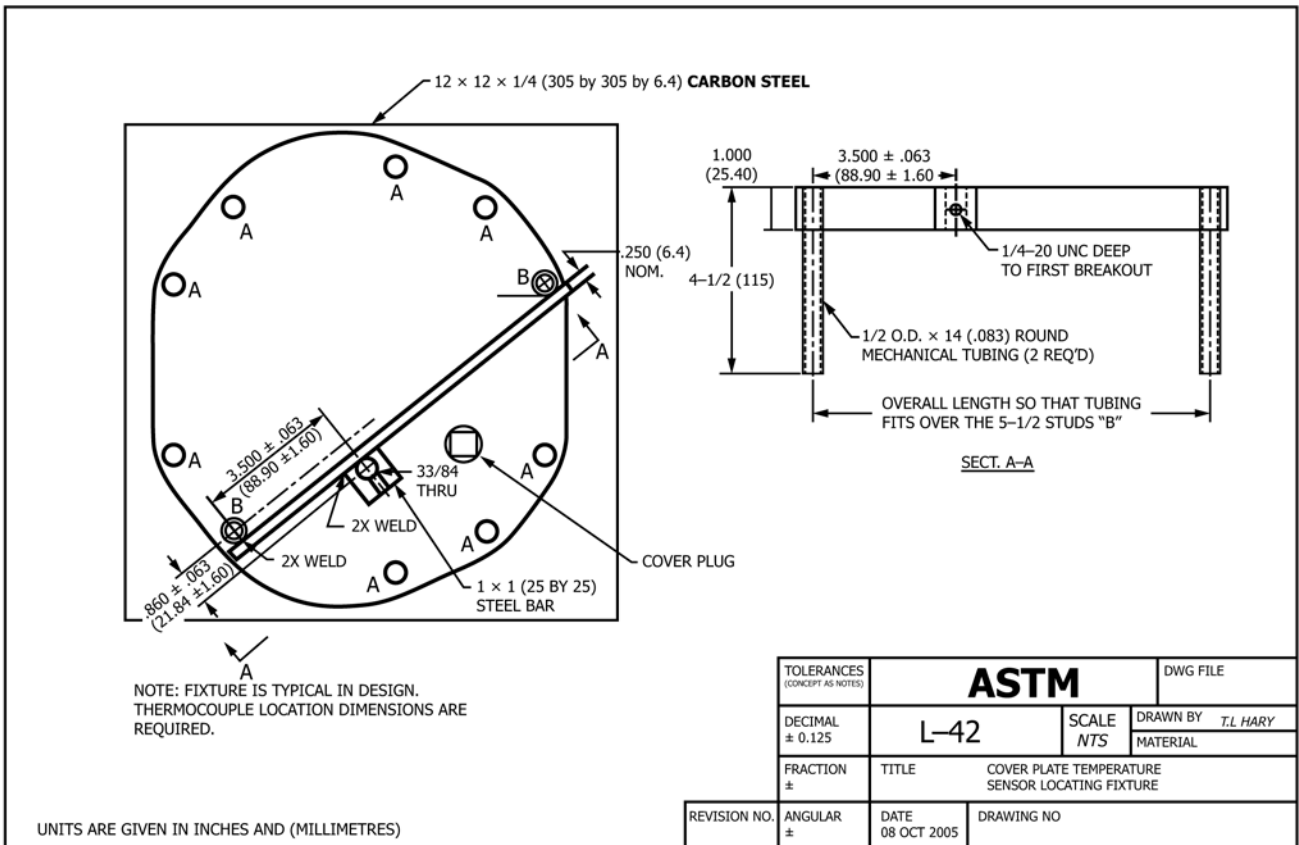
Cover Plate Temperature Sensor Locating Device
